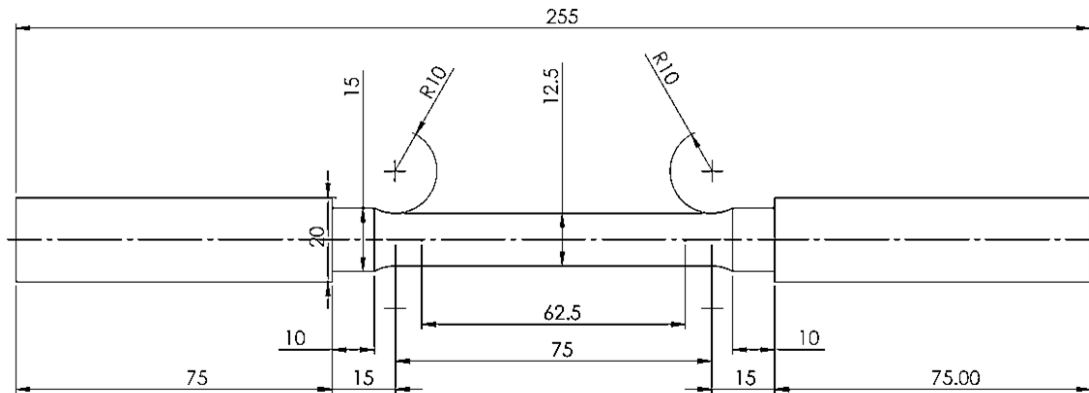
Geometry and dimensions of the smooth tensile specimen, all in mm
